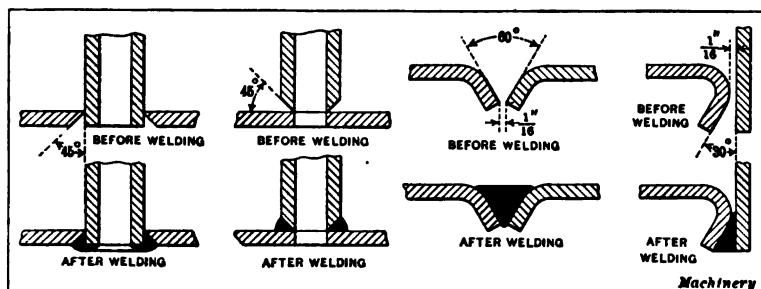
Other Methods of preparing Piping for Welding
